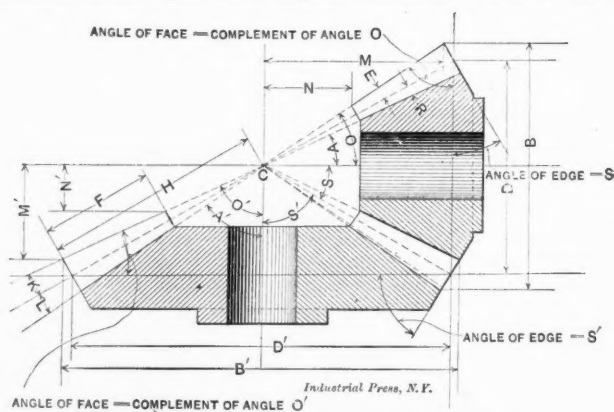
Drawing for Bevel Gears, from Data Sheet.
